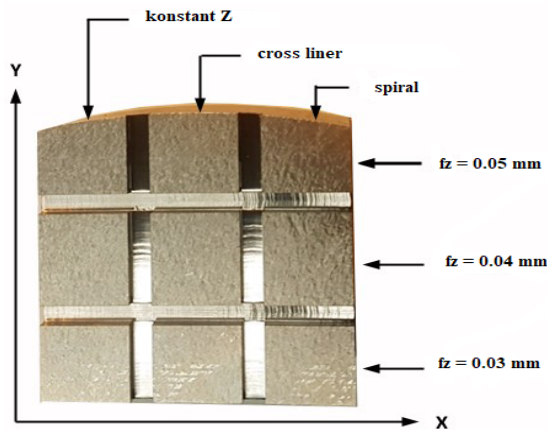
View on work-piece with used cutter path strategies and feed per tooth
